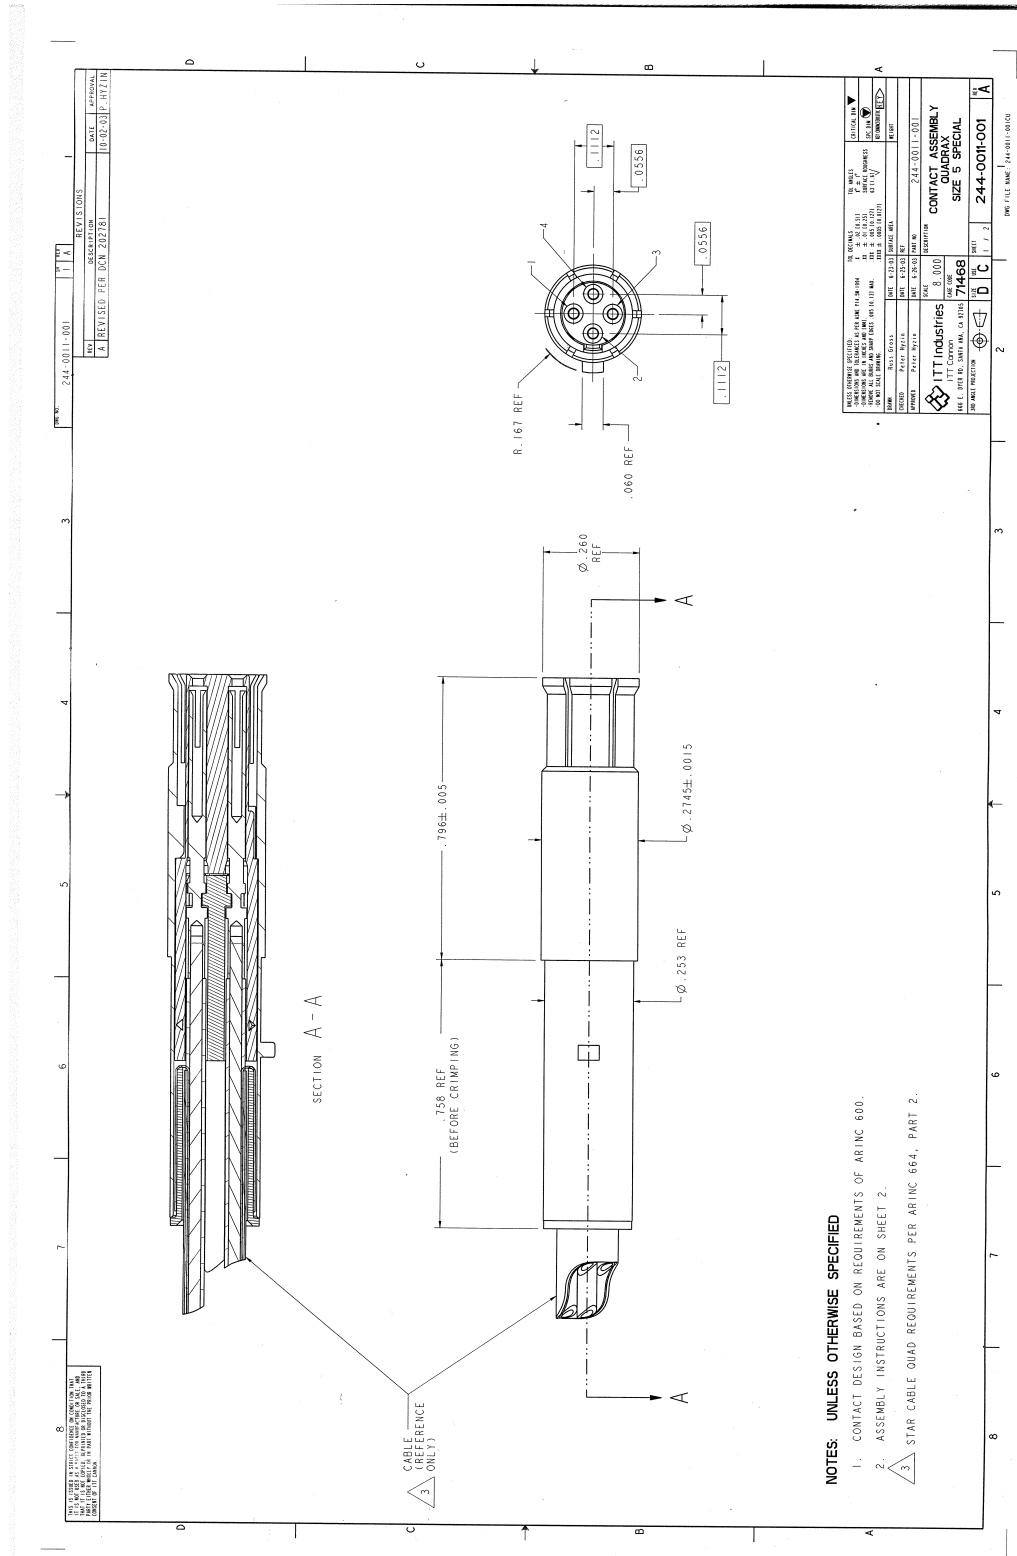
Contact Assembly: Quadrax Pin size 5 special: ITT Cannon 244-0011-001
